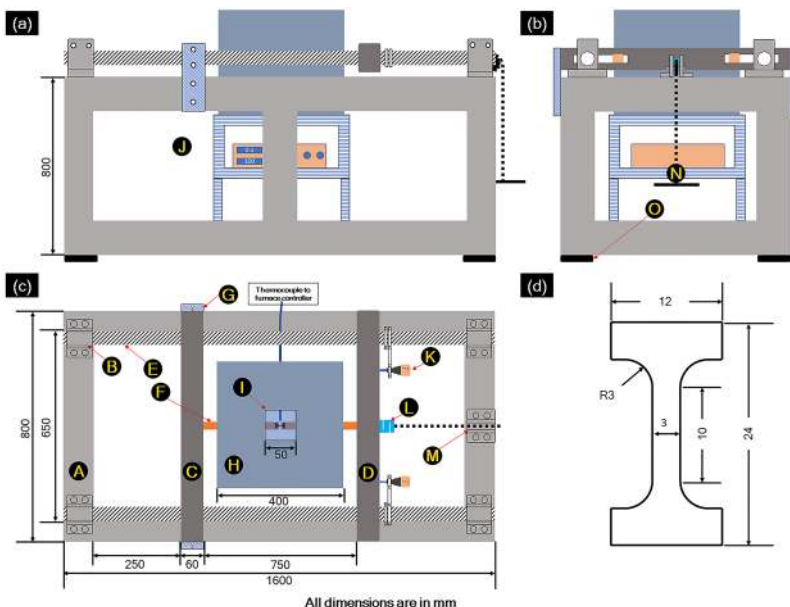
Plan views of the in-house-built horizontal type creep testing machine: (a) front plan view, (b) side plan view, (c) top plan view (important parts are indicated in capital letters), and (d) schematic drawing of tensile specimen used for creep testing.
